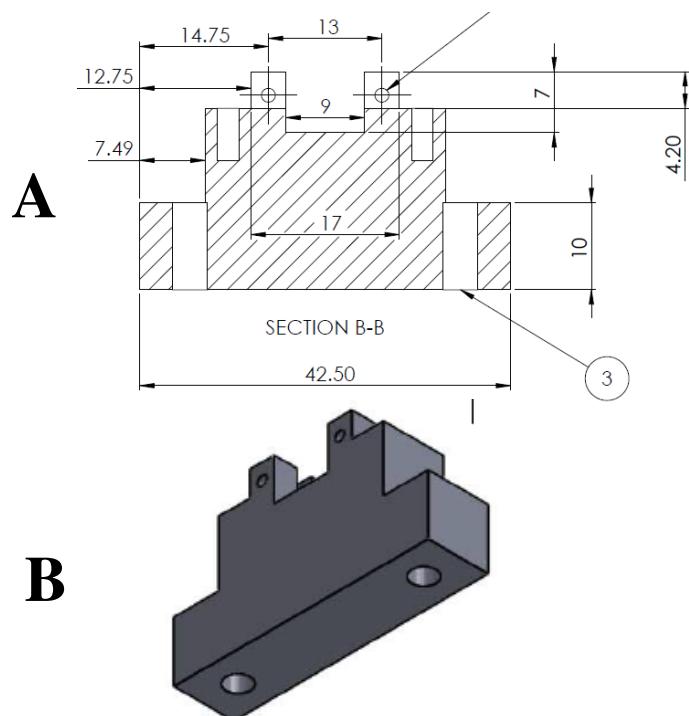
a) Tester bend fixture geometry b) 3D view of the bend fixture. Units in mm.
